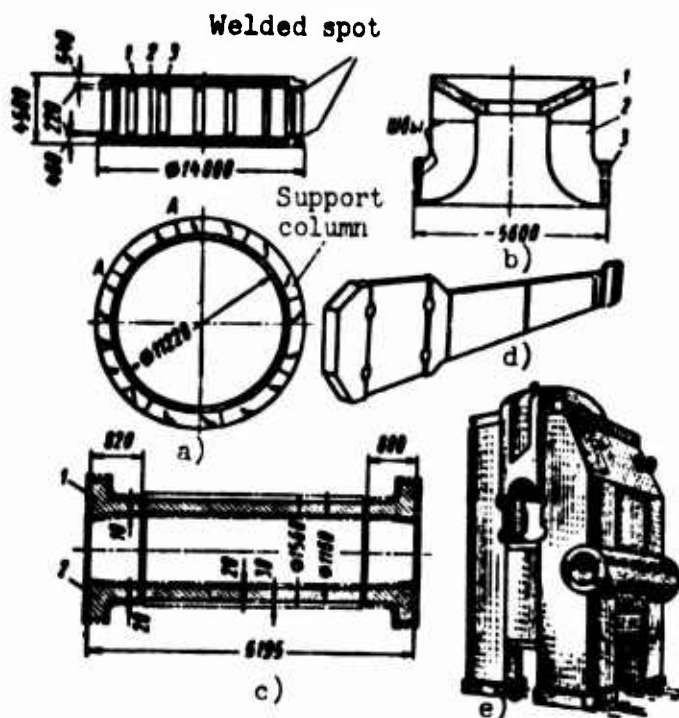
Welded-poured, welded-forged and welded constructions: a) stator of hydroturbine; b) operating wheel of a hydroturbine; c) welded shaft; d) welded element of hydropress (weight near 95 m); e) welded bed of a crank press (weight near 90 m).
